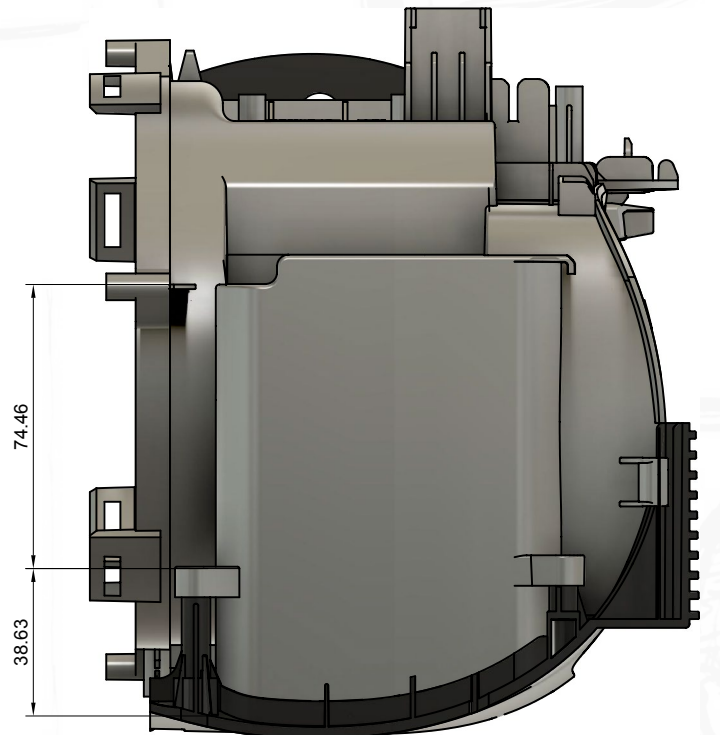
, Lower housing screw pole dimension and distance between screw hole and top surface in the new redesign
